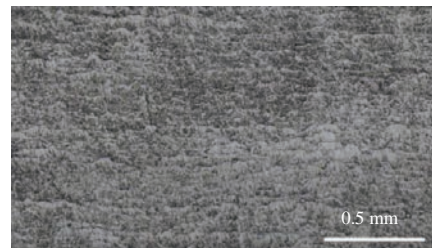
Workpiece surface after forming with T2 wet ($v_f = 500$ mm/min).
